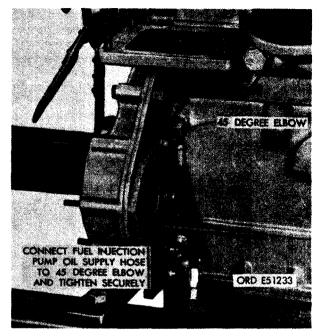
CONNECTING FUEL INJECTION PUMP OIL SUPPLY HOSE.
